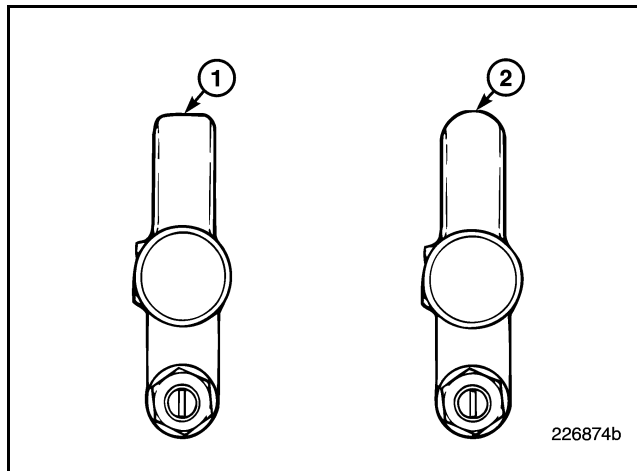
ASET™/E-Tech™ and E7 Valve Yokes (Top View)
